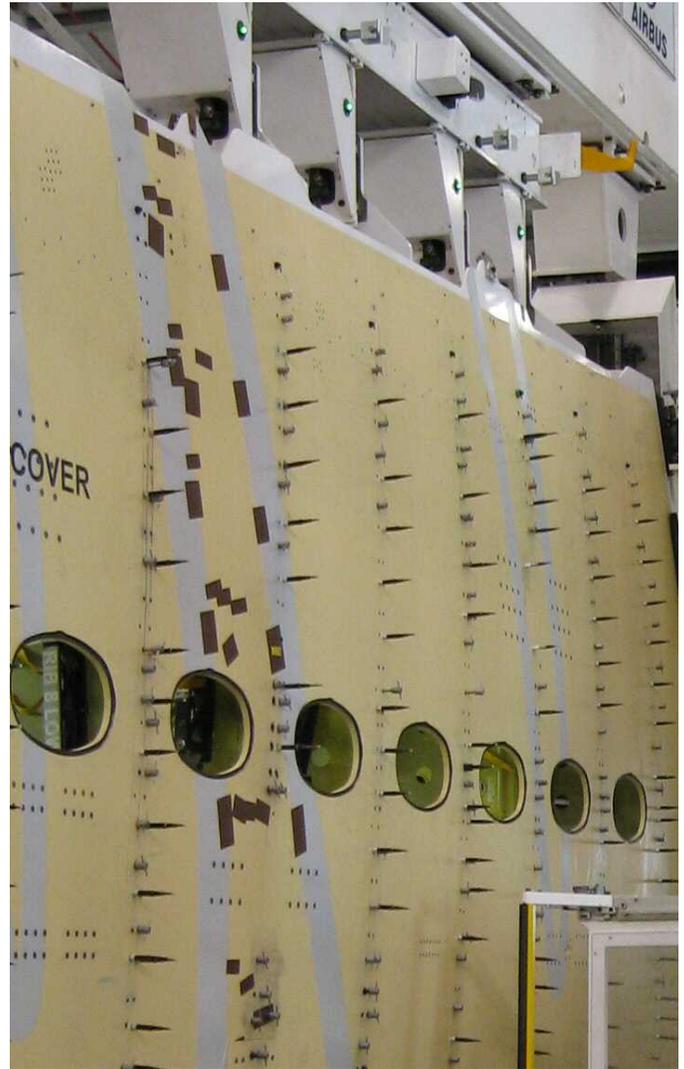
Traditional outer wing box build using dowel pins and Cleco-type fasteners.
